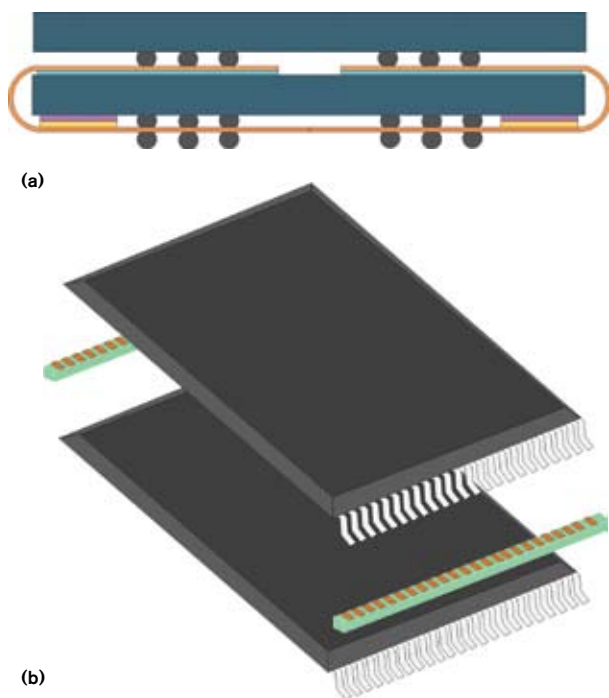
You can use a flex circuit and a PCB interposer to stack BGA (a) or TSOP (b) DRAM.
